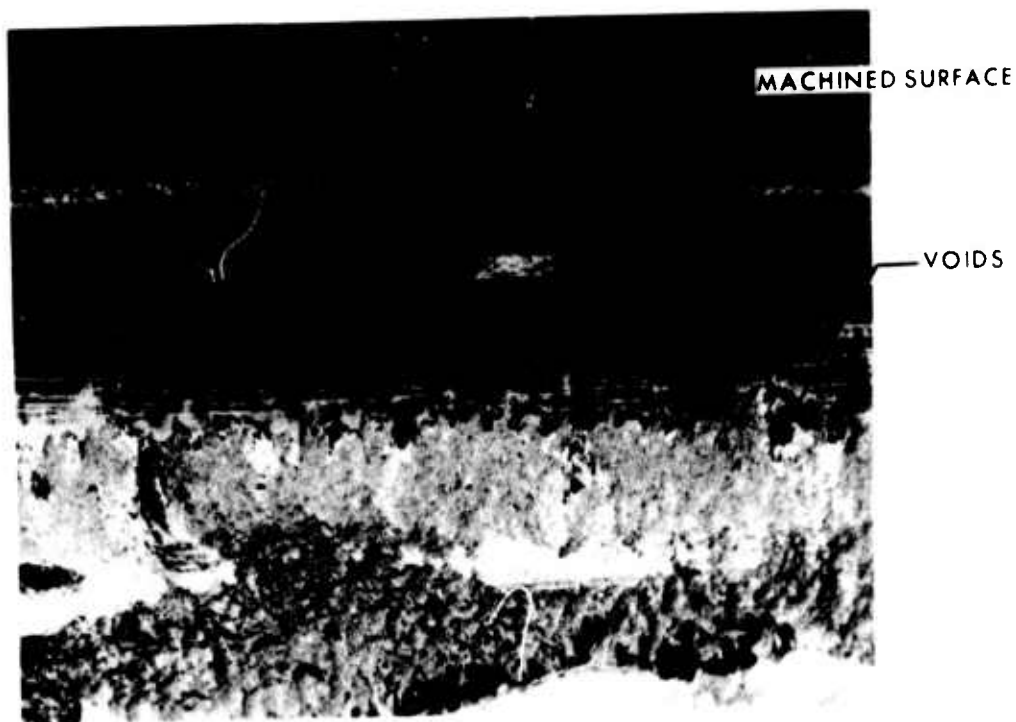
Machined Diameter - Fractured Section - Second-Row Pinion.
